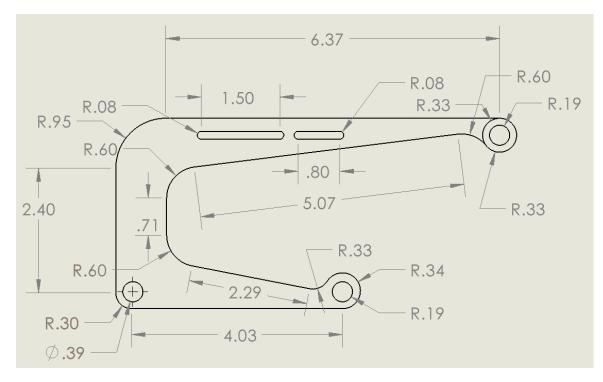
Zoomed in View of Dimensionalised Engineering Drawing of our Structure
